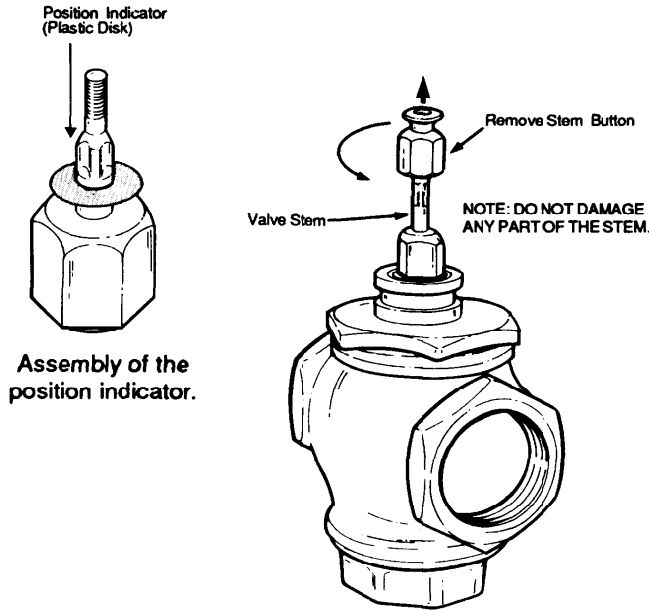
PREPARATION FOR VALVE ASSEMBLY.
